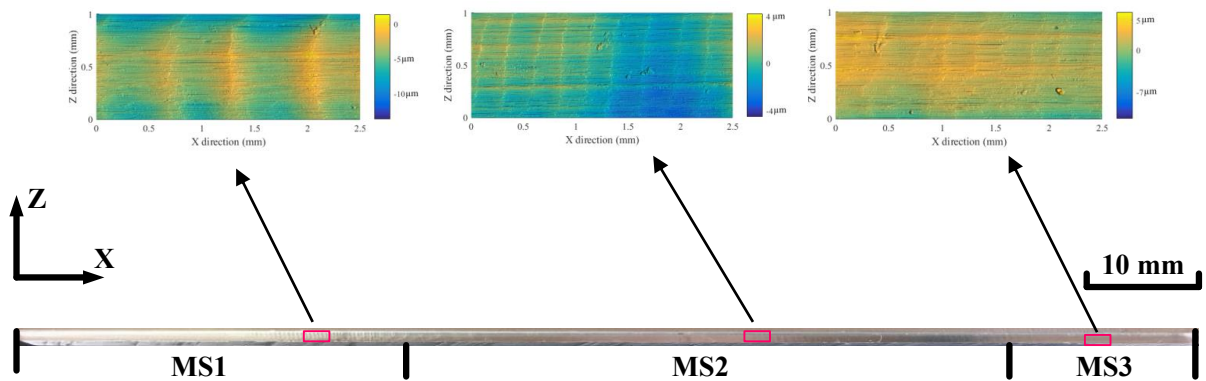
Surface topography of workpiece for the machining parameter (5000 rpm, 1 mm)
